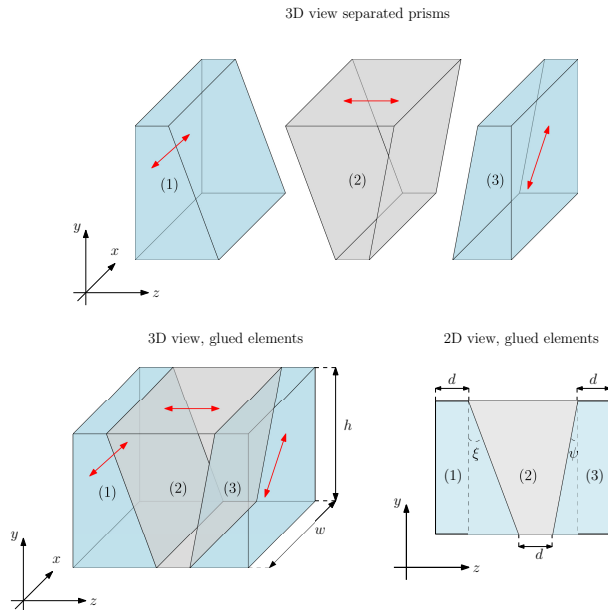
Modulator design for manufacturing. The double red arrows indicate the orientation of the optical axes in each component prism. Accepted dimensions and tolerances are shown in Tab. 9.1.
